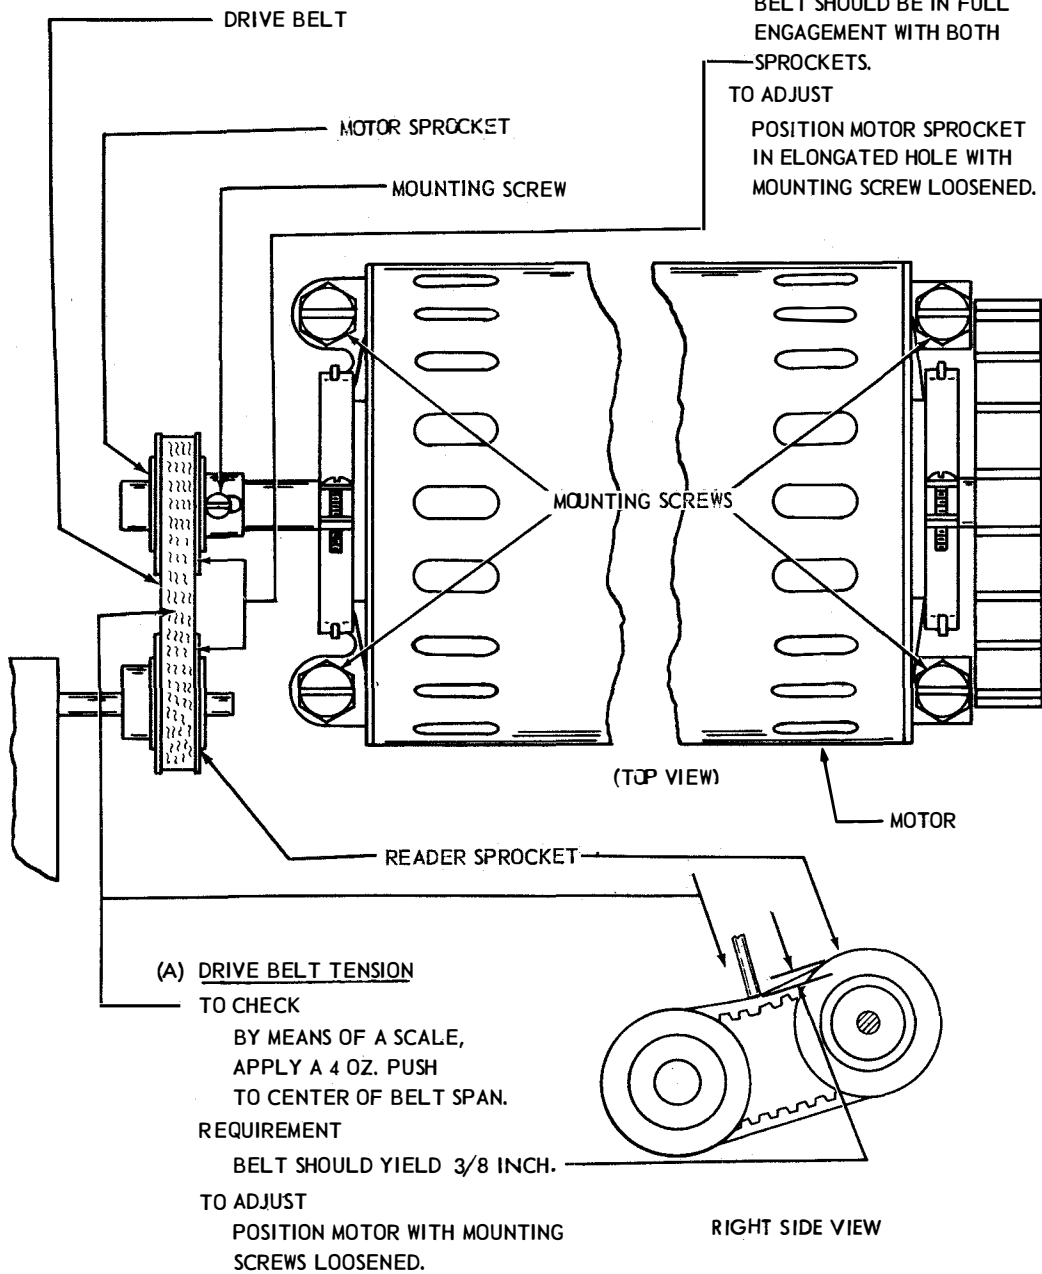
DRIVE PARTS (SINGLE UNIT)
